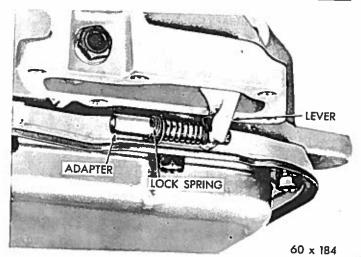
Cable Adapter Attached to Parking Lock Lever
